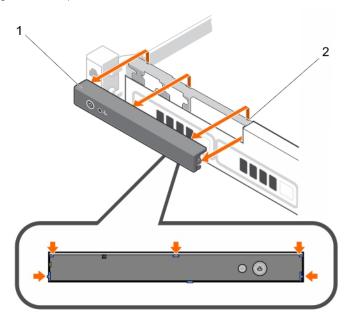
Removing the control panel—four 3.5-inch hard drive chassis
